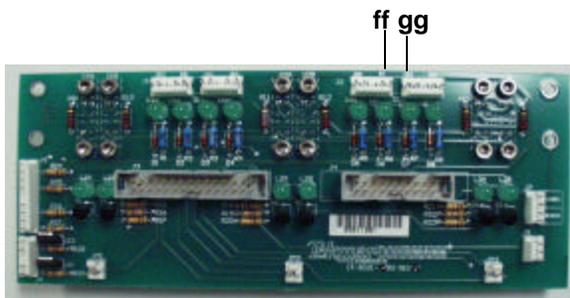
Purge Valve Connection on the Valve Interface Board
